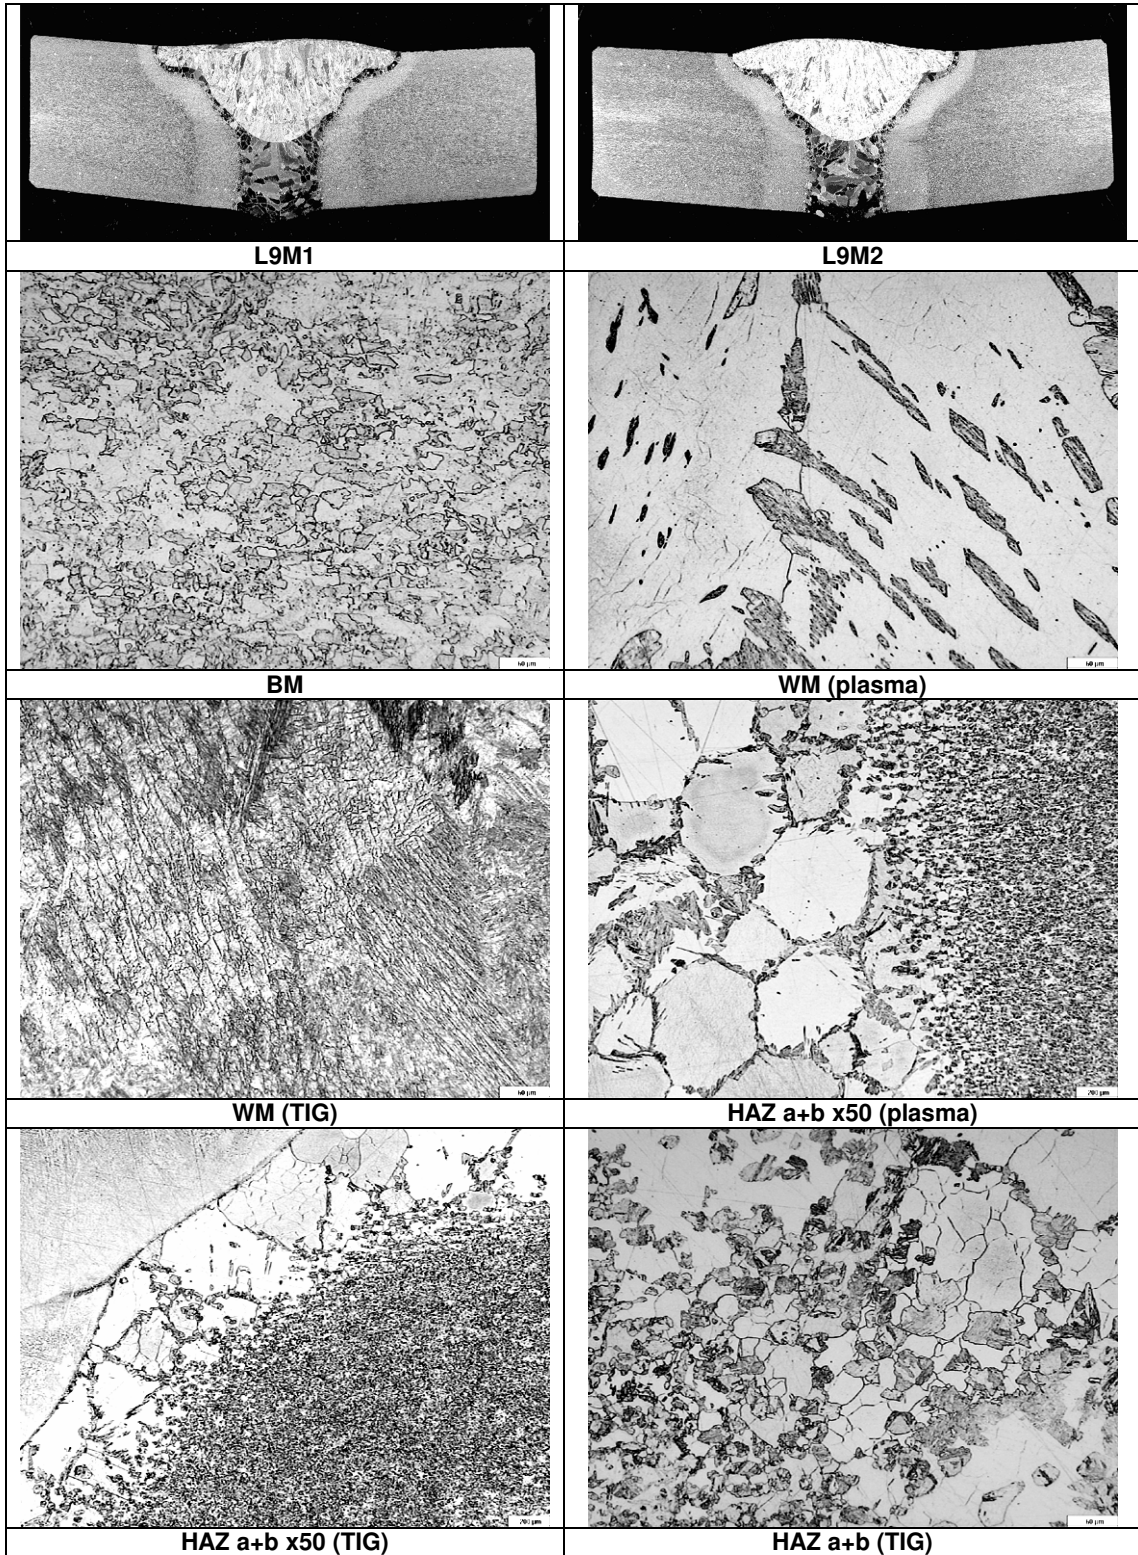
Macro and micrographs of 12 mm thick PAW + TIG weld with 309 filler metal (L9).
